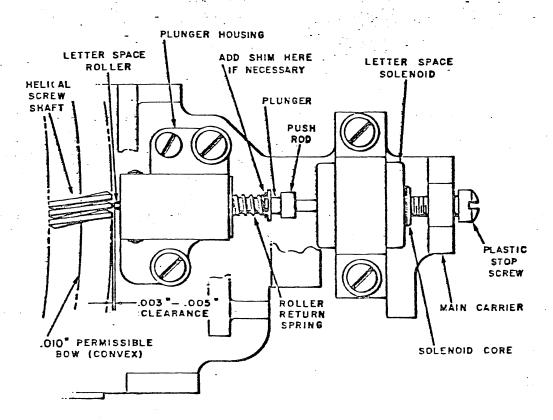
Letter Space Roller Housing and Plunger Assembly
